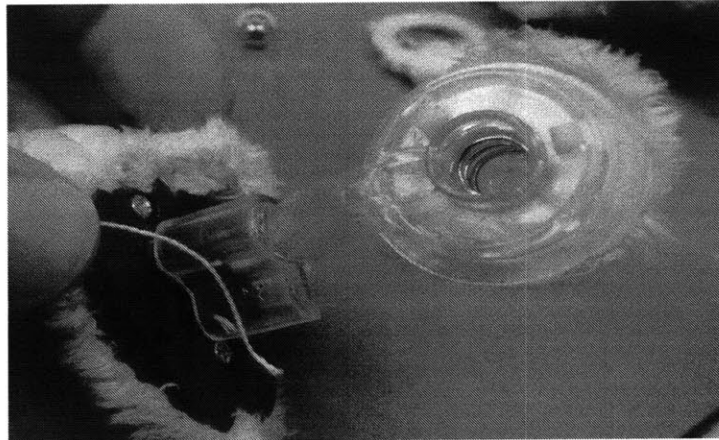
The leg assembly of the Baby Furby. The spring of the spring loaded clutch is visible. This spring keeps a notch on the outer ring aligned with a matching ridge on the internal drive mechanism unless potentially damaging torques are applied.
